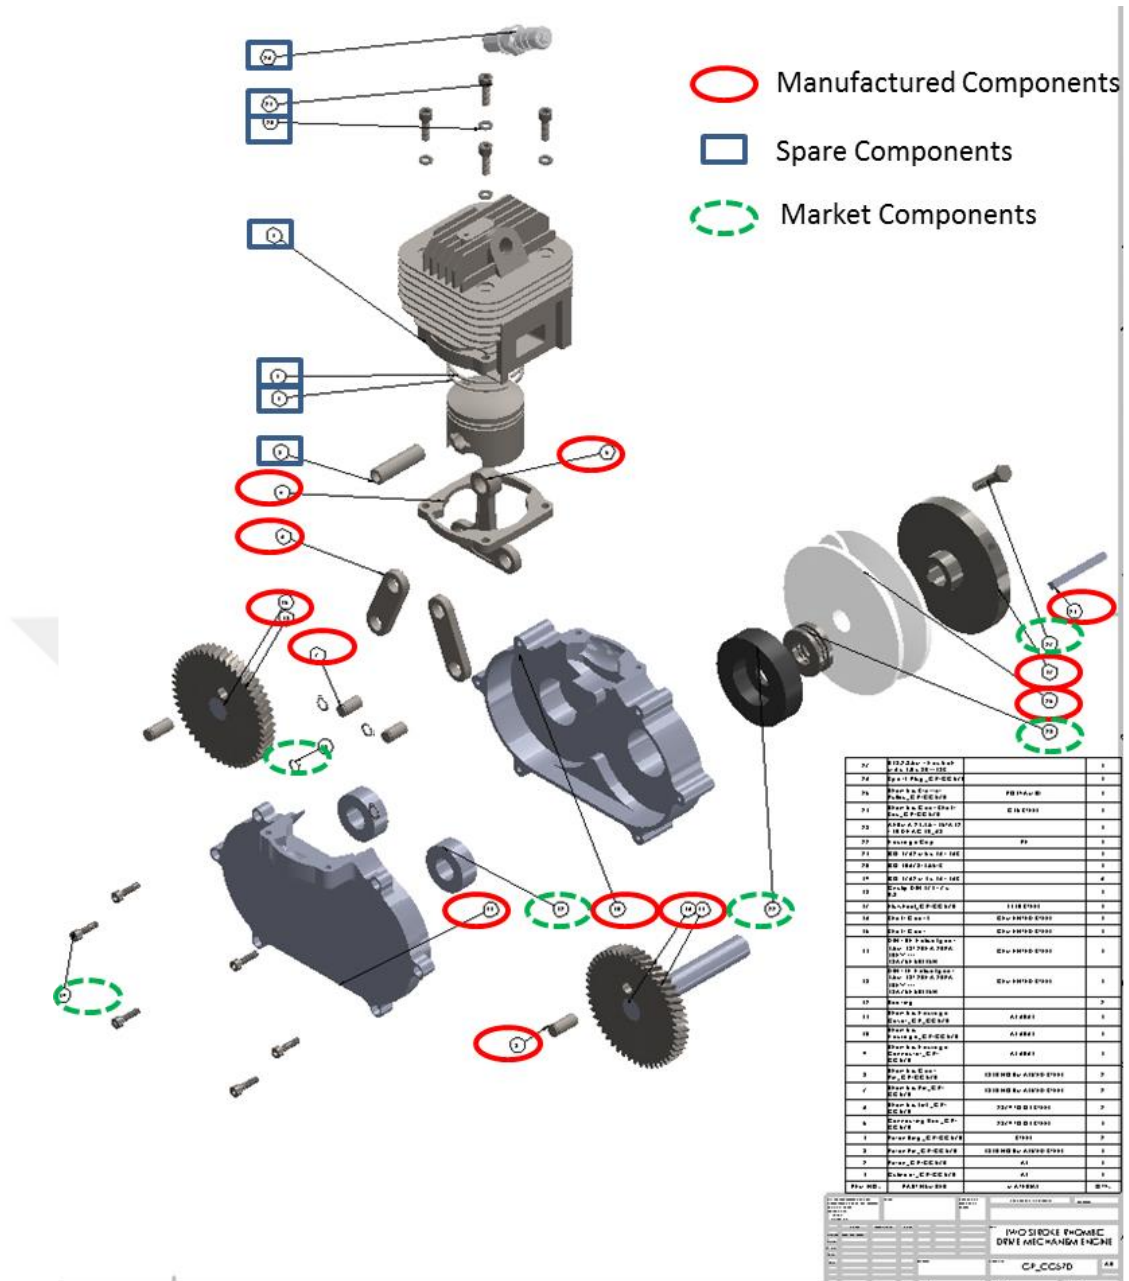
Exploded view of the rhombic drive mechanism engine
